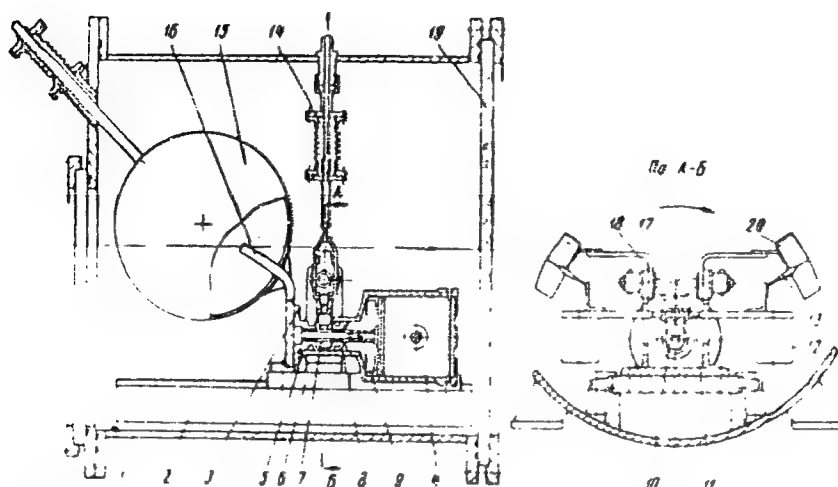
1--vacuum box; 2--directional guide; 3--friction disc; 4--driving mechanism; 5--housing; 6--plate; 7--assay bushing; 8--shaft; 9--union; 10--race; 11--beam, 12--rod; 13--arm; 14--release device; 15--copper container; 16--copper tire; 17--spring; 18--arresting device; 19--window; 20--dial.
